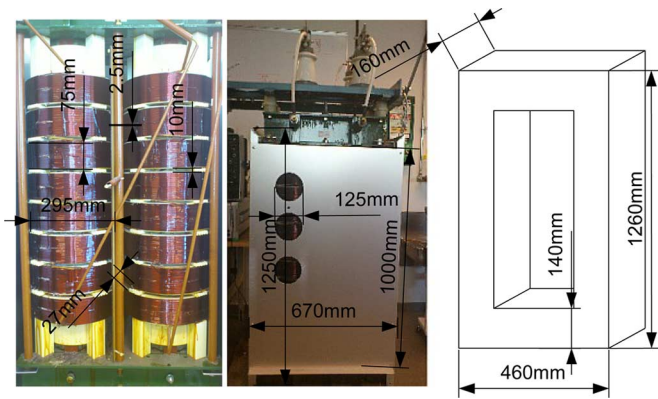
Test reactor (winding dimensions, shield dimensions, and core dimensions).
